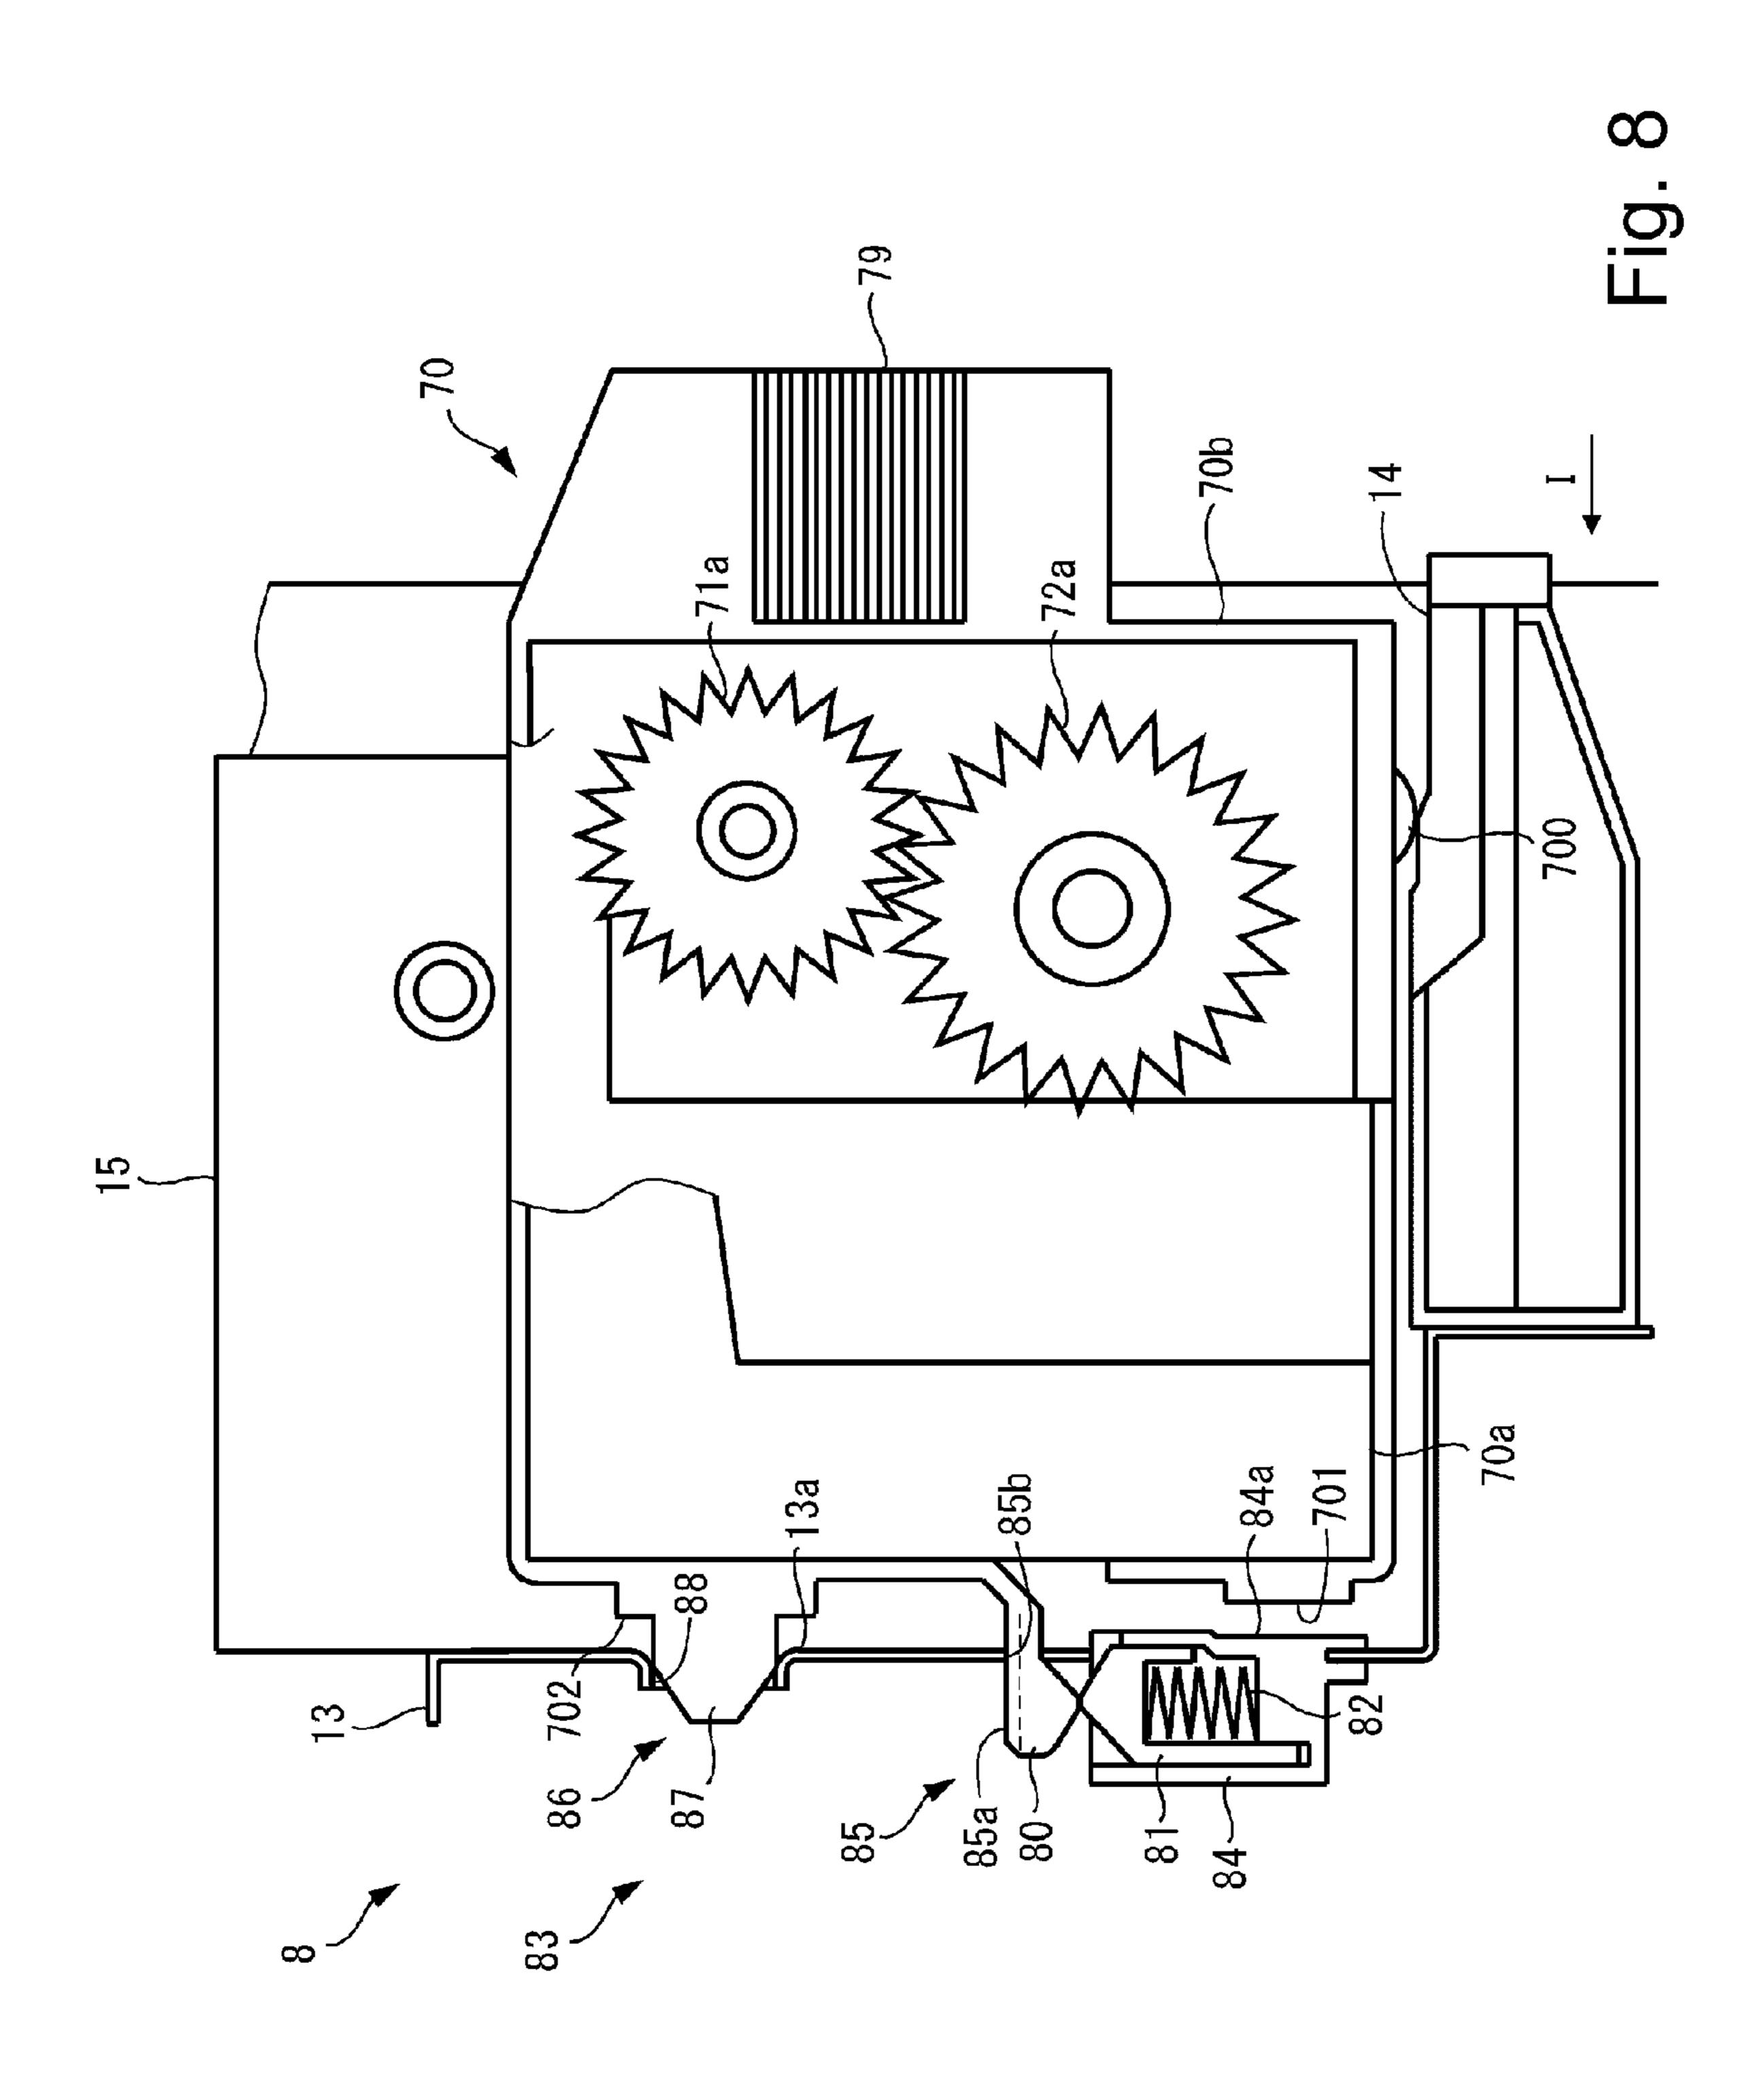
IMAGE FORMING APPARATUS HAVING FIXING UNIT DETACHABLY MOUNTABLE TO A MAIN ASSEMBLY OF THE APPARATUS
